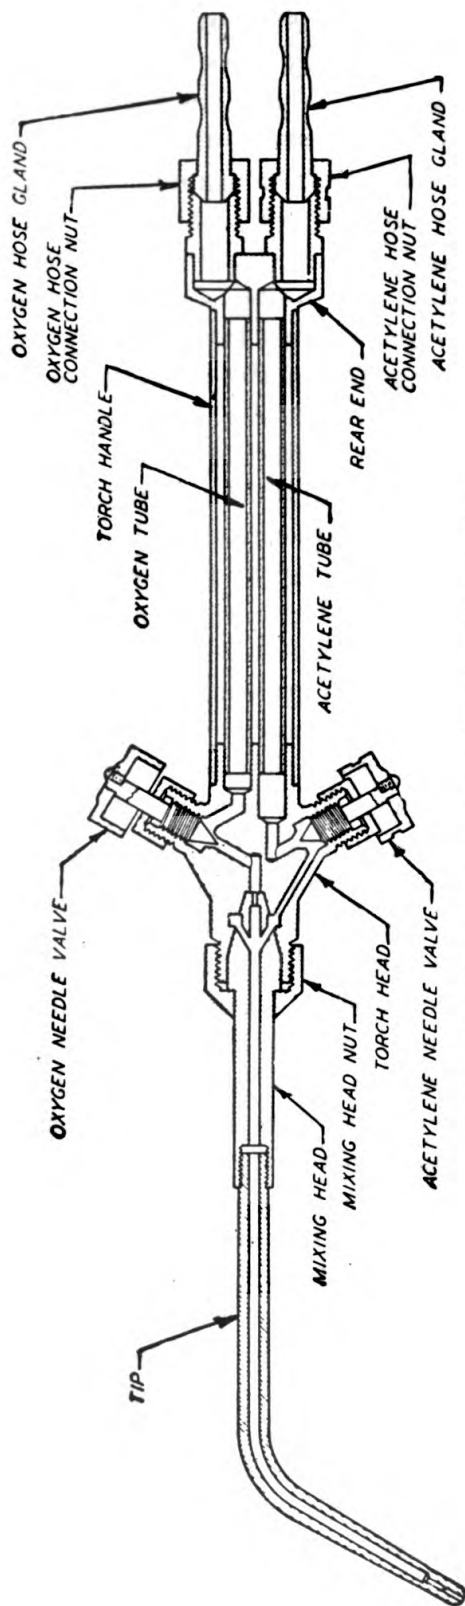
Equal pressure type aircraft welding torch.
